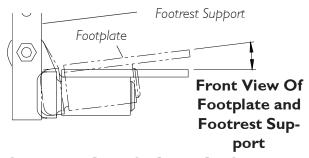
ADJUSTABLE ANGLE FLIP-UP FOOTPLATE PERPENDICULAR AND/ OR INVERSION/EVERSION ADJUSTMENT
